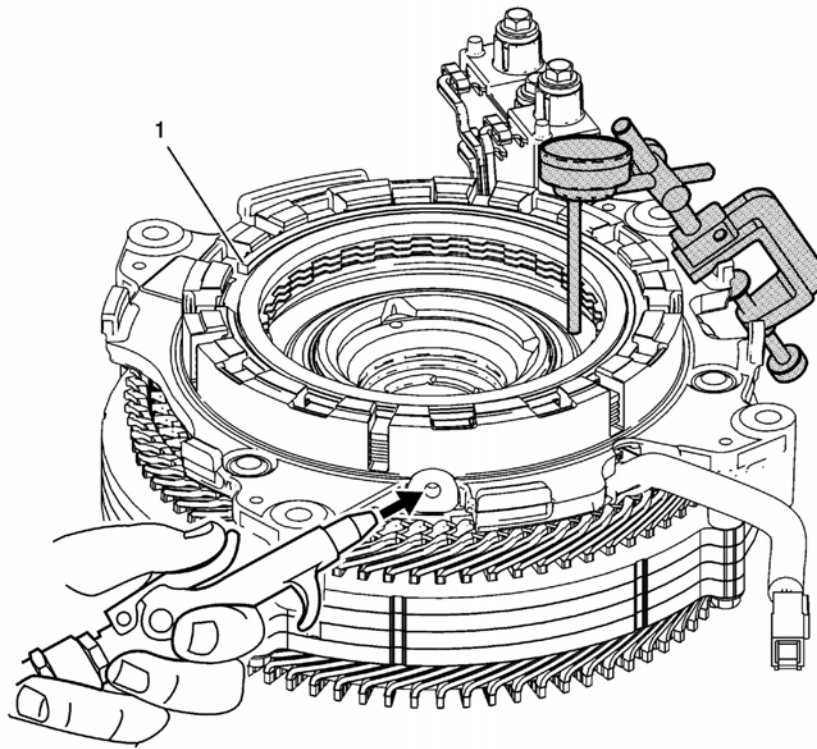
Variable Low Clutch Backing Plate Retaining Ring Measurement
